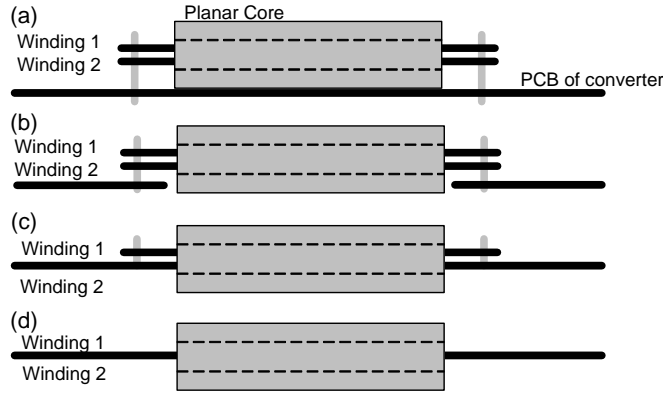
Techniques of assembling the magnetic planar element in the main PCB.
